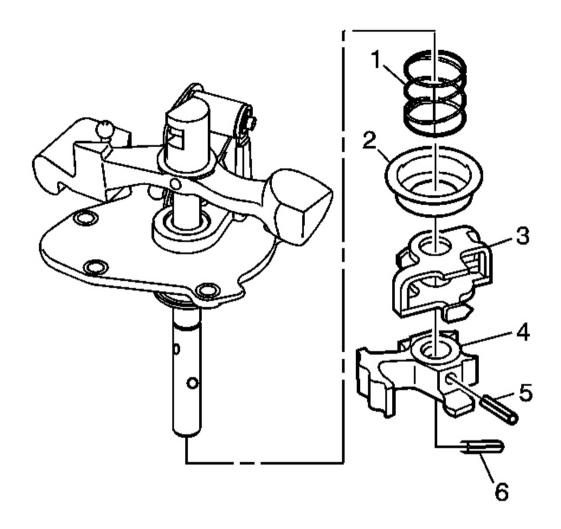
Reverse Inhibit, Roll Pin, Outer/Inner Control Lever, End Cap & Outer Spring Courtesy of GENERAL MOTORS CORP.
